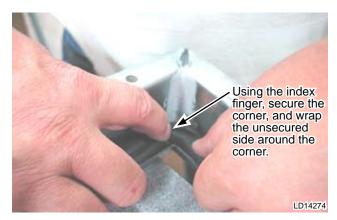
PLACE GASKET ON LATCH SIDE OF FRAME
